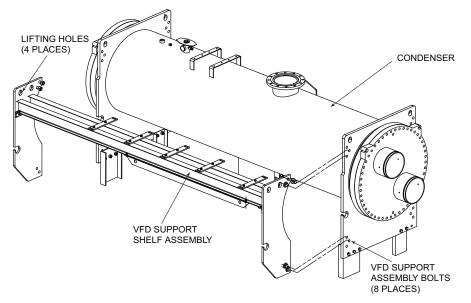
900A or 1200A VFD Support Assembly Installation
